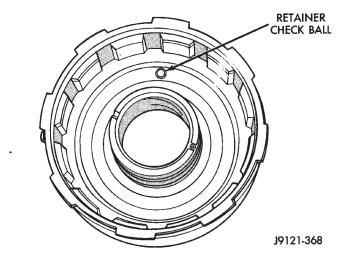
Front Clutch Piston Retainer Check Ball Location
